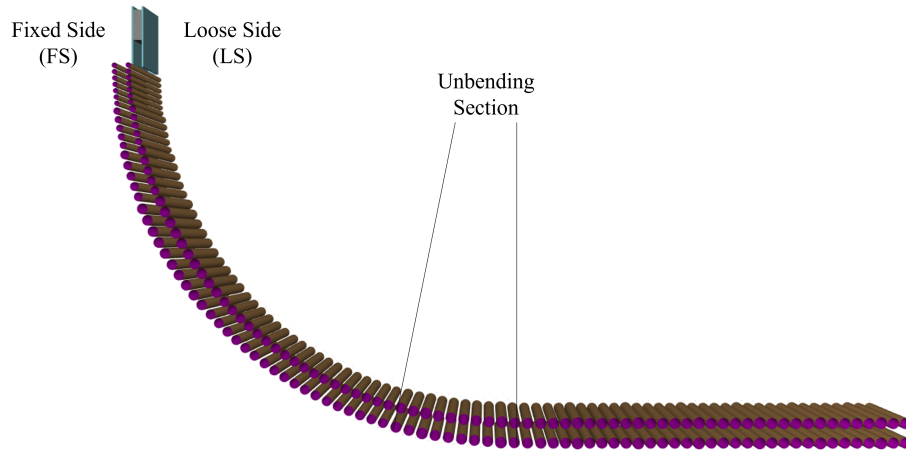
Schematic of a continuous caster, showing the unbending section and labelled faces.
